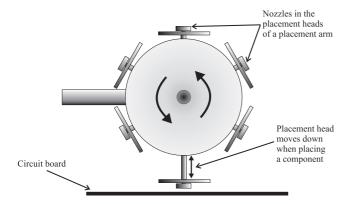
A side view of the placement arm of Figure 1. The arm has 6 placement heads in which nozzles are attached.
